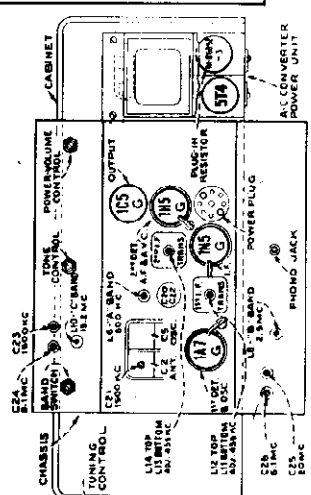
TUBE TRIMMER AND PARTS LOCATION
